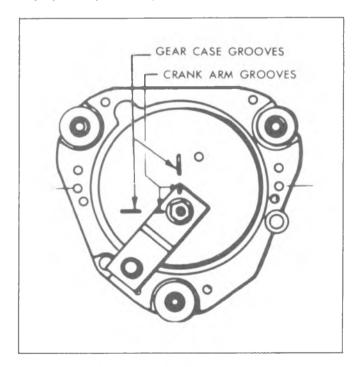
Wiper Motor Crank Arm in Park Position
